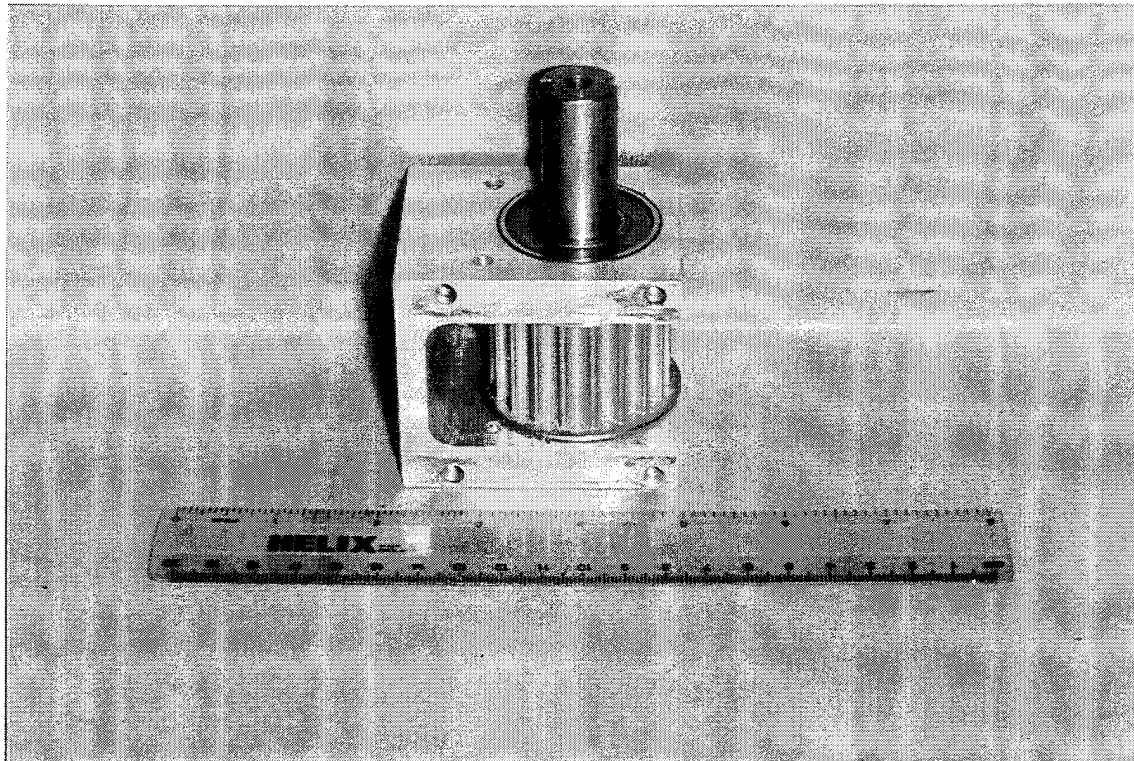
Intermediate Gear with Sprague Clutches Installed
